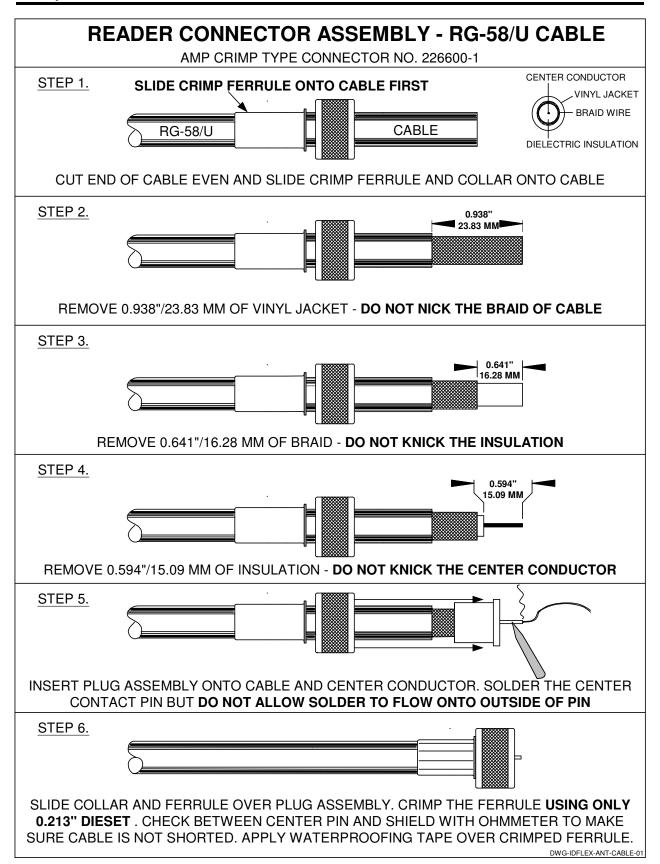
RG-58/U Amp 226600-1 Installation
